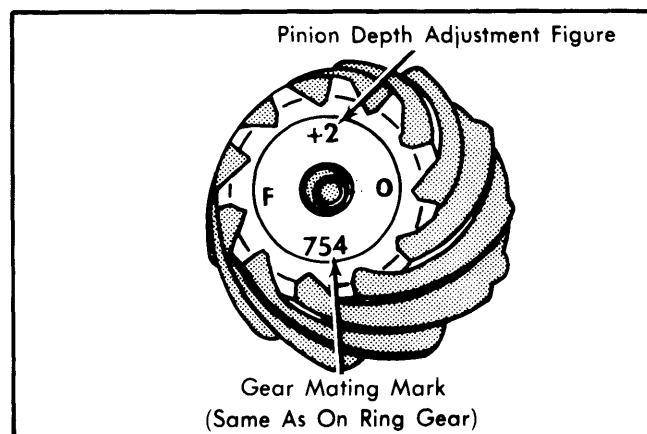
Pinion Markings Showing Pinion Depth Adjustment Figure
